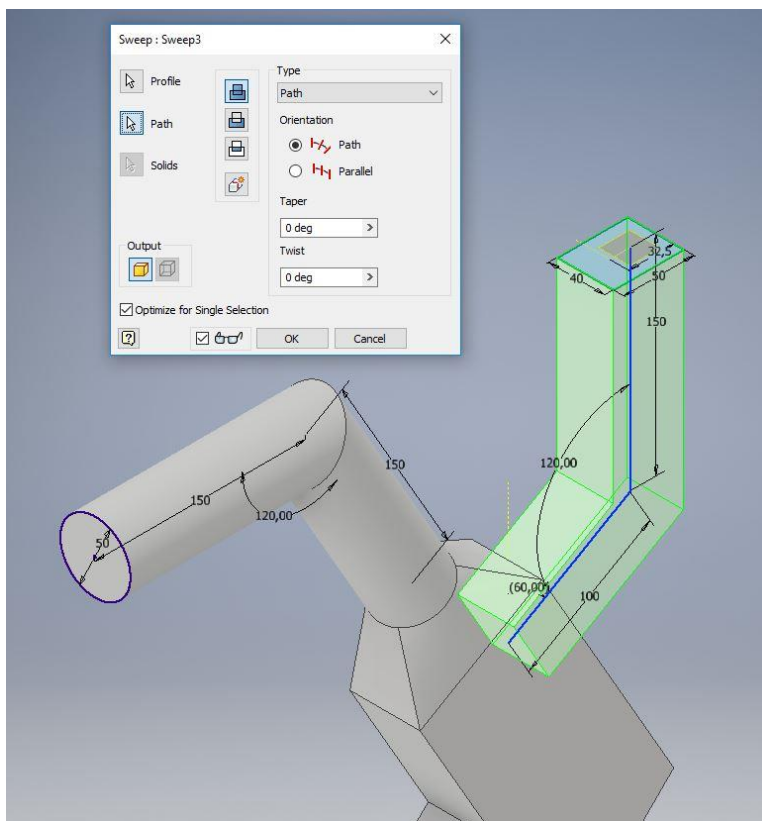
The Design of the inlet pipe for the coal feed using the “Sweep” tool.
